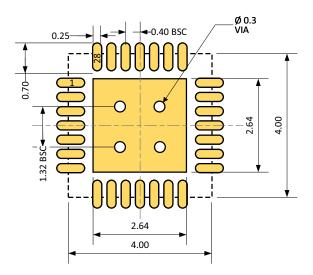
Recommended board layout for QFN28 package (all dimensions in mm)
